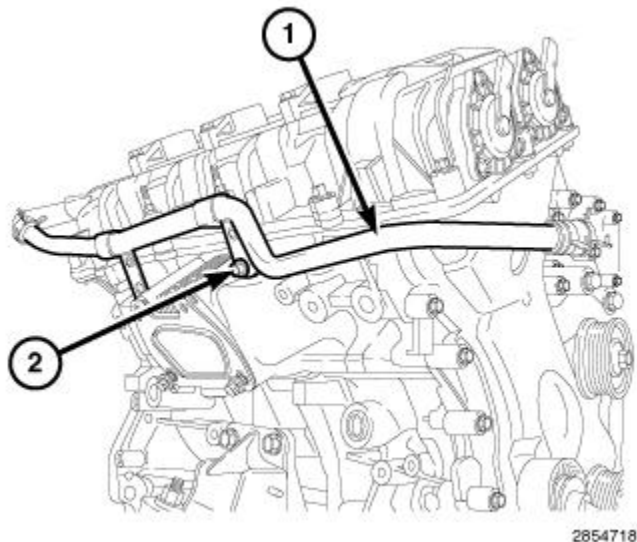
Heater Core Supply Tube Support Bracket & Retaining Bolt
